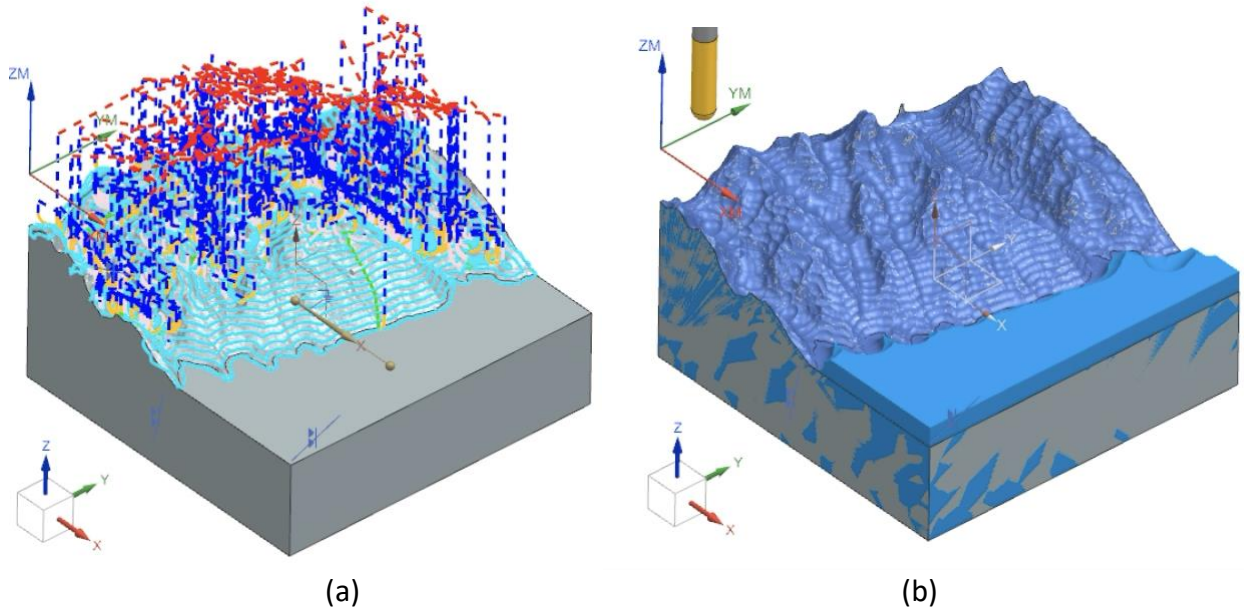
Finishing 1 – Area Milling  $\frac{1}{4}$ " ballmill (a) tool path and (b) IPW.
